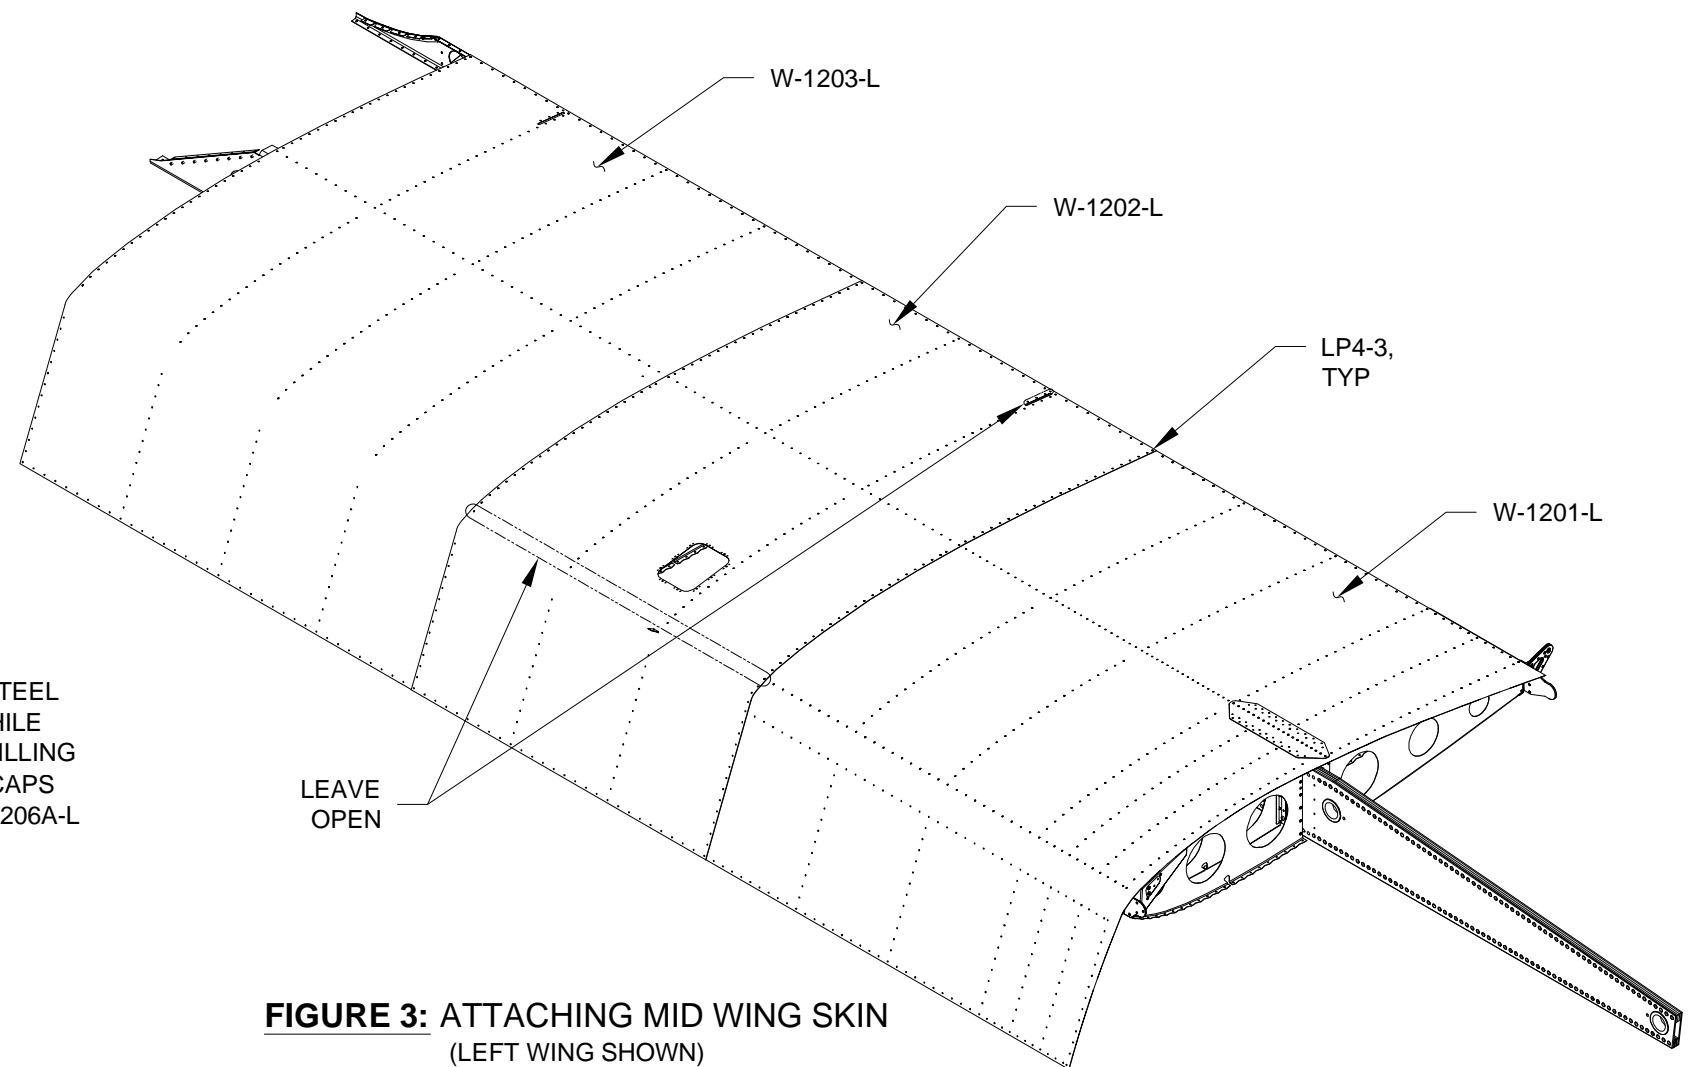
ATTACHING MID WING SKIN (LEFT WING SHOWN)
